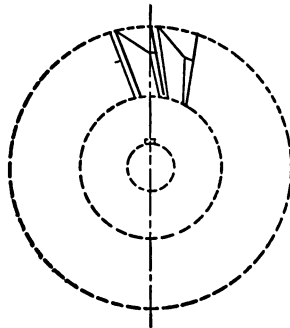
Milling Cutter Teeth with Positive Front Rake
